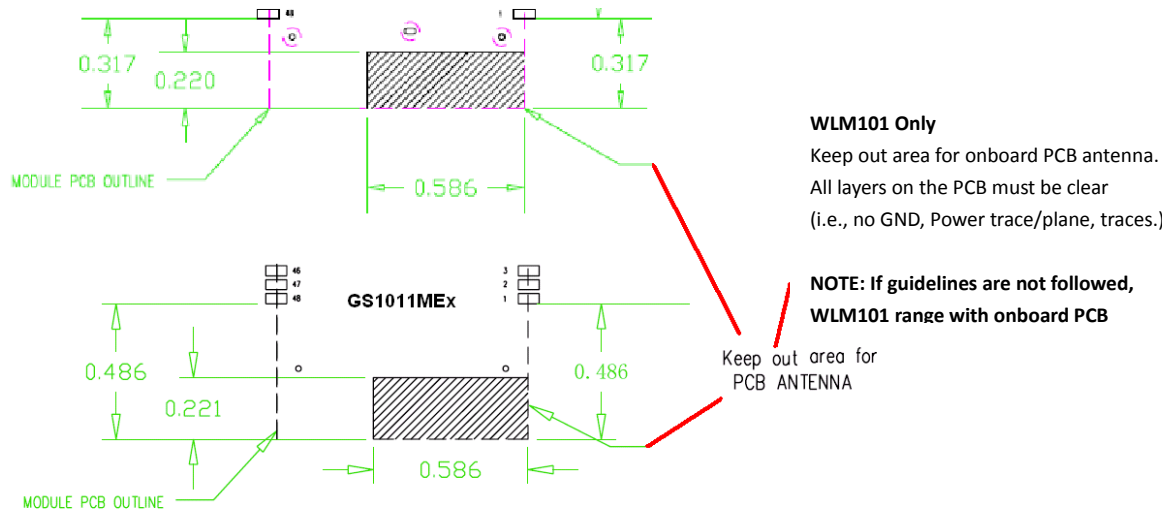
WLM101 Module Onboard Antenna End Application Board Keep-Out Layout Guidelines (Dimensions are in inches)
